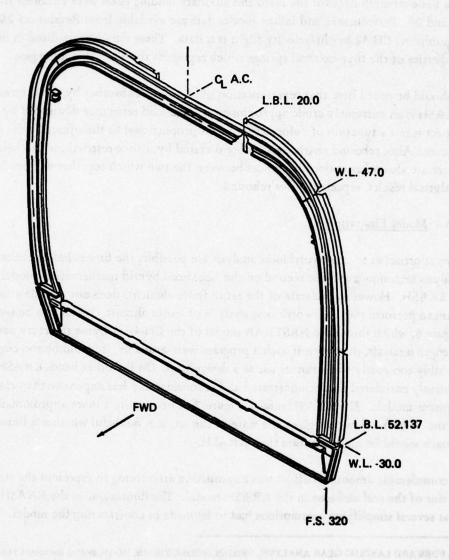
Typical CH-47A Center Section Fuselage Frame.
